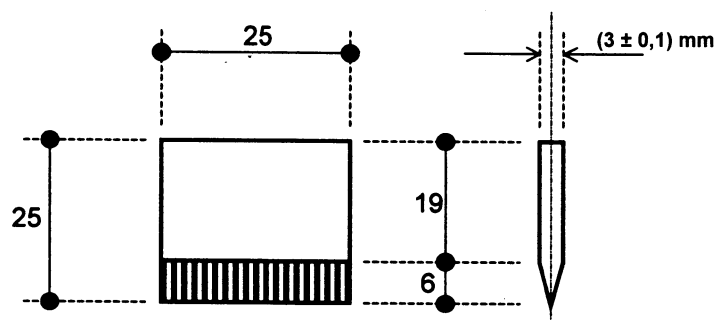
Wedge test – aluminium or stainless steel wedge
